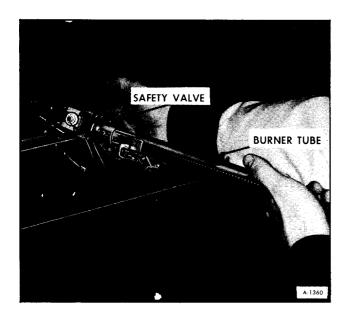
Removing Burner Tube and Safety Valve as a Unit
